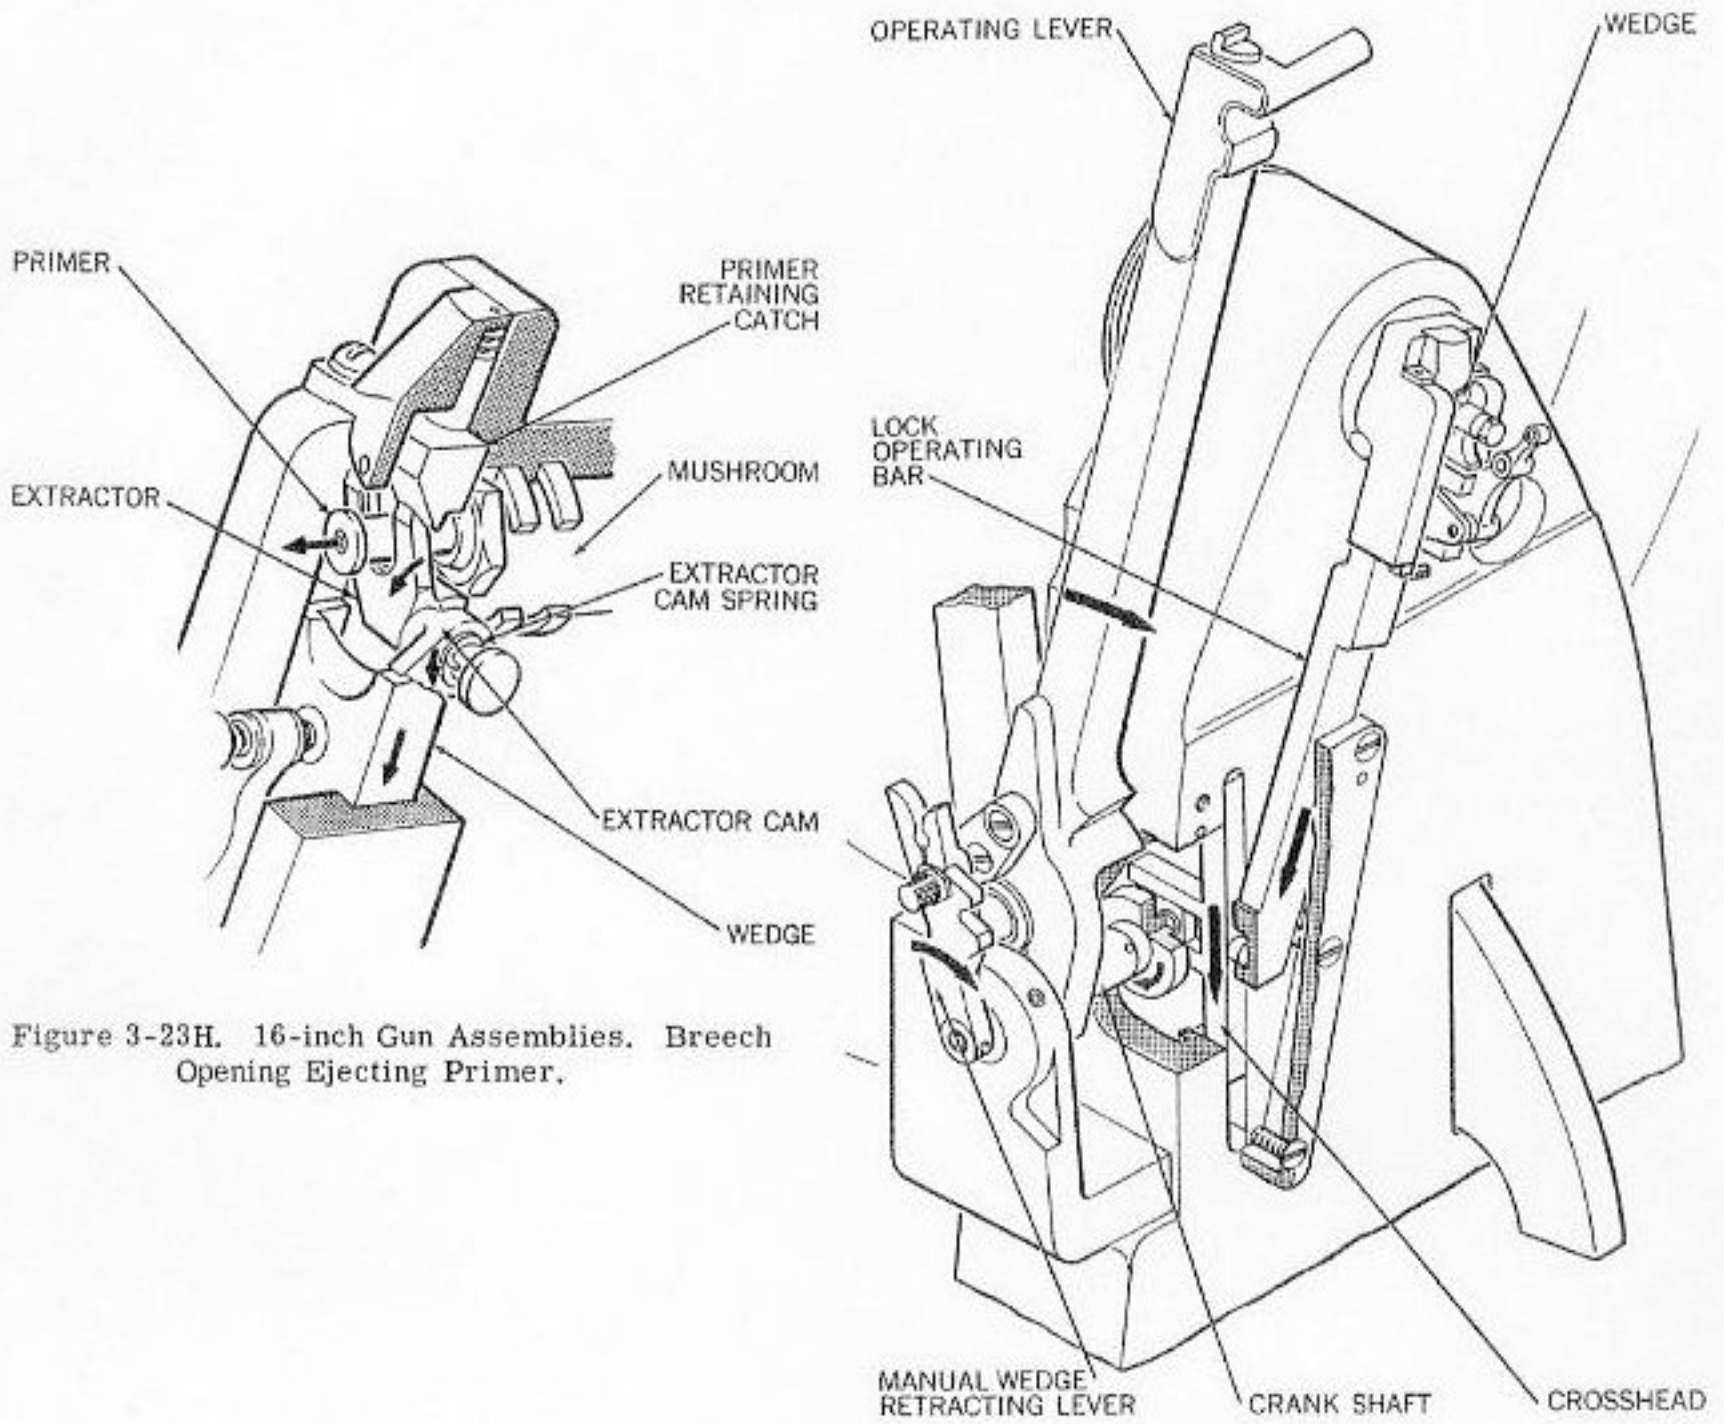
H. 16-inch Gun Assemblies. Breech Opening Ejecting Primer.
